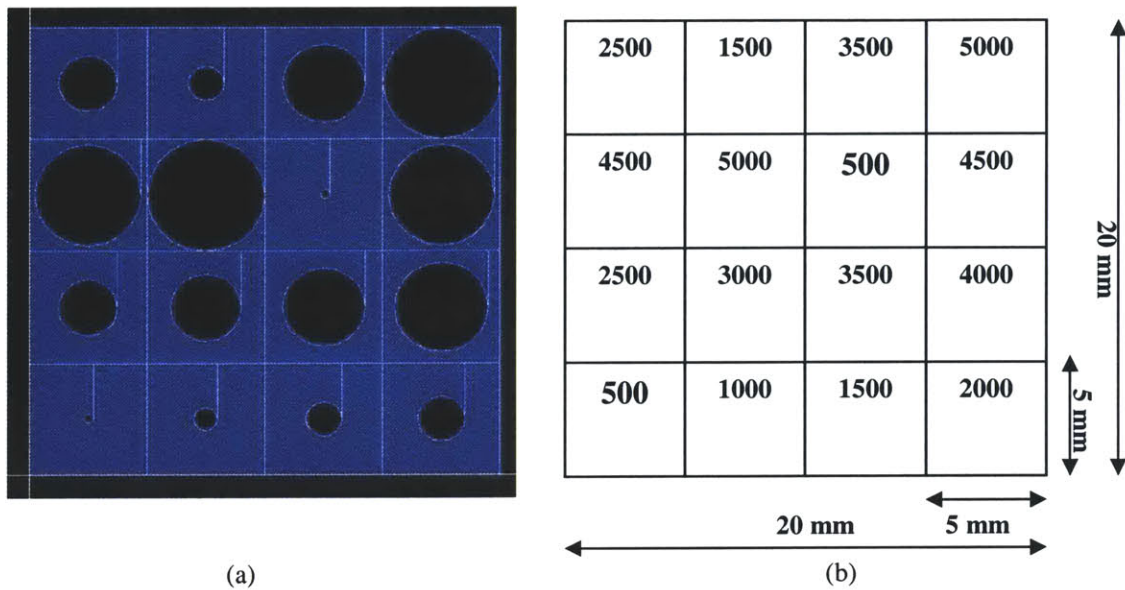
Picture (a) and schematic (b) of the Holes test die.
